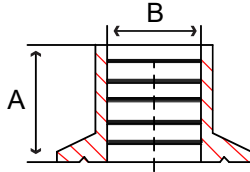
WB4 - Weld x Male NPT Adapter
